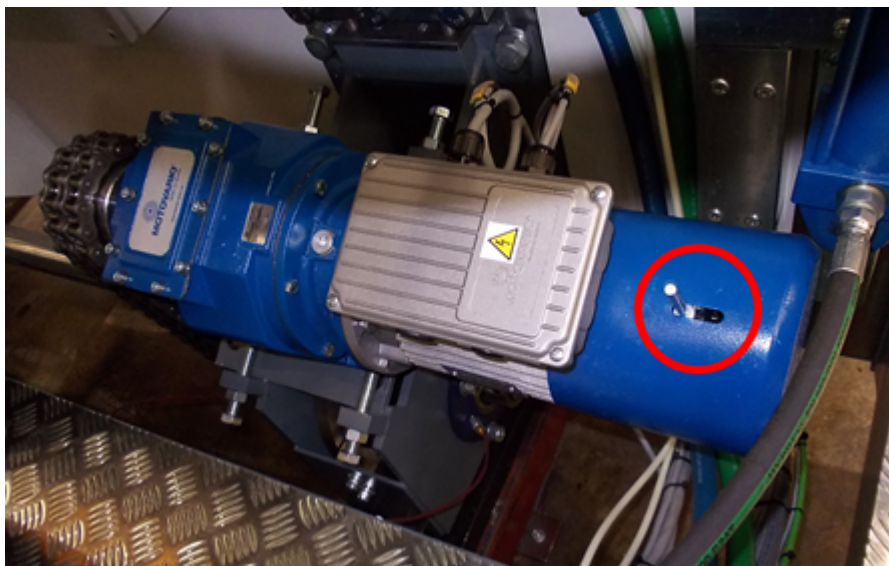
Motor and gearbox with the inbuilt brake
